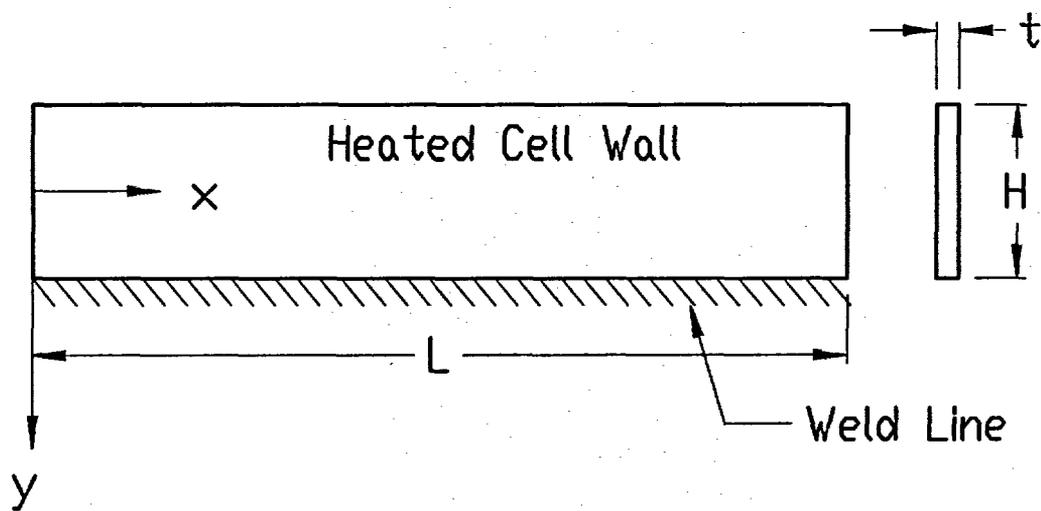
; WELDED JOINT IN RACK
